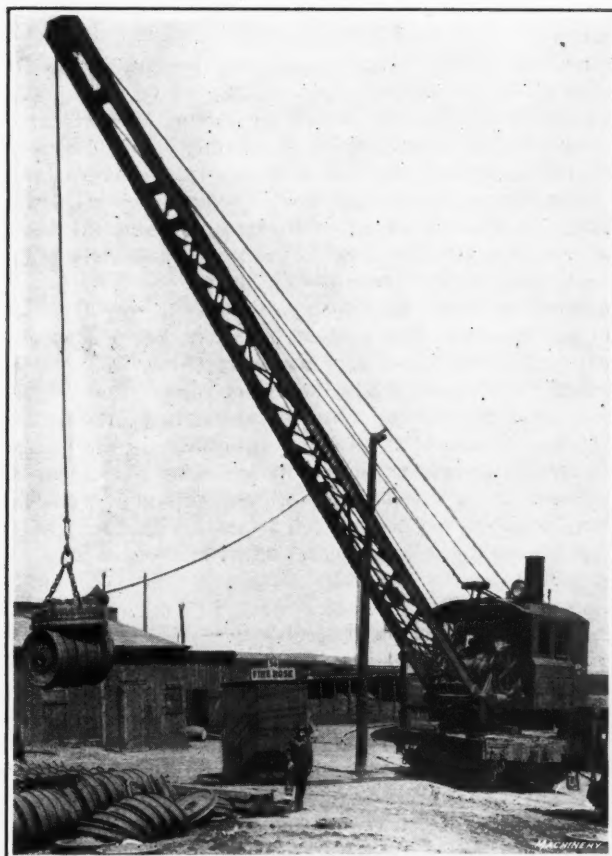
A locomotive crane is useful for handling materials in factory yards where there is a lot of space to be covered. This equipment may be employed as a switch engine when there is no lifting to be done. The illustration shows a locomotive crane and lifting magnet used by the Griffin Wheel Co., Chicago, Ill., for handling car wheels
